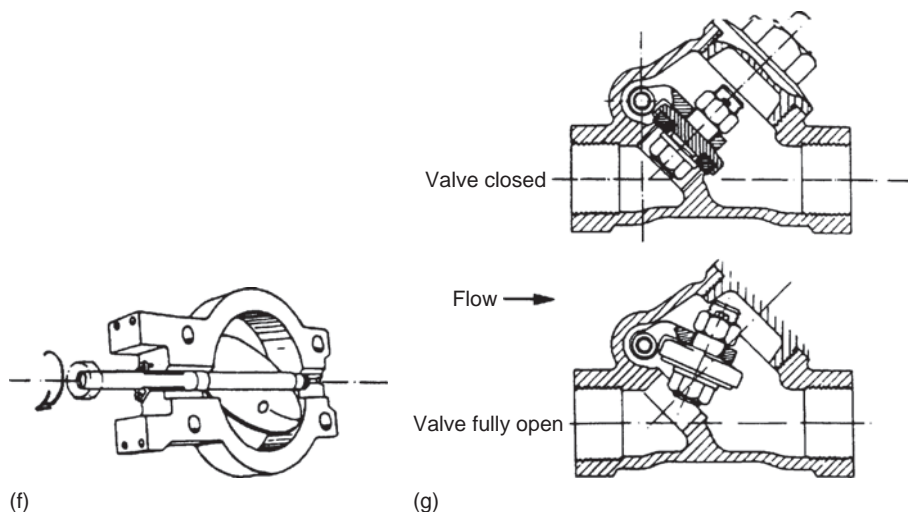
Cont'd. (f) Butterfly valve. (g) Nonreturn valve, check valve, hinged disc type.
